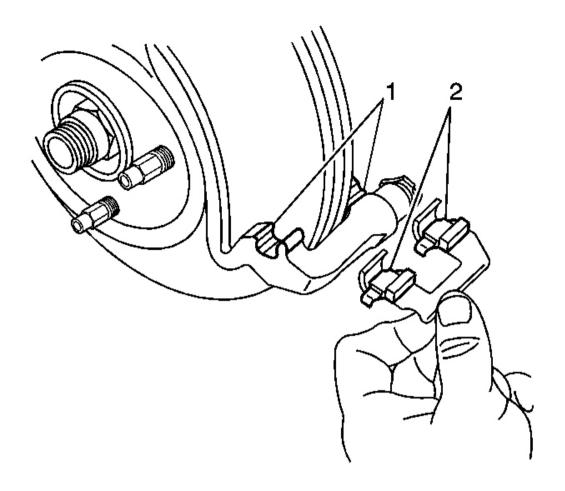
Removing/Installing Brake Pad Retainers Courtesy of GENERAL MOTORS CORP.
